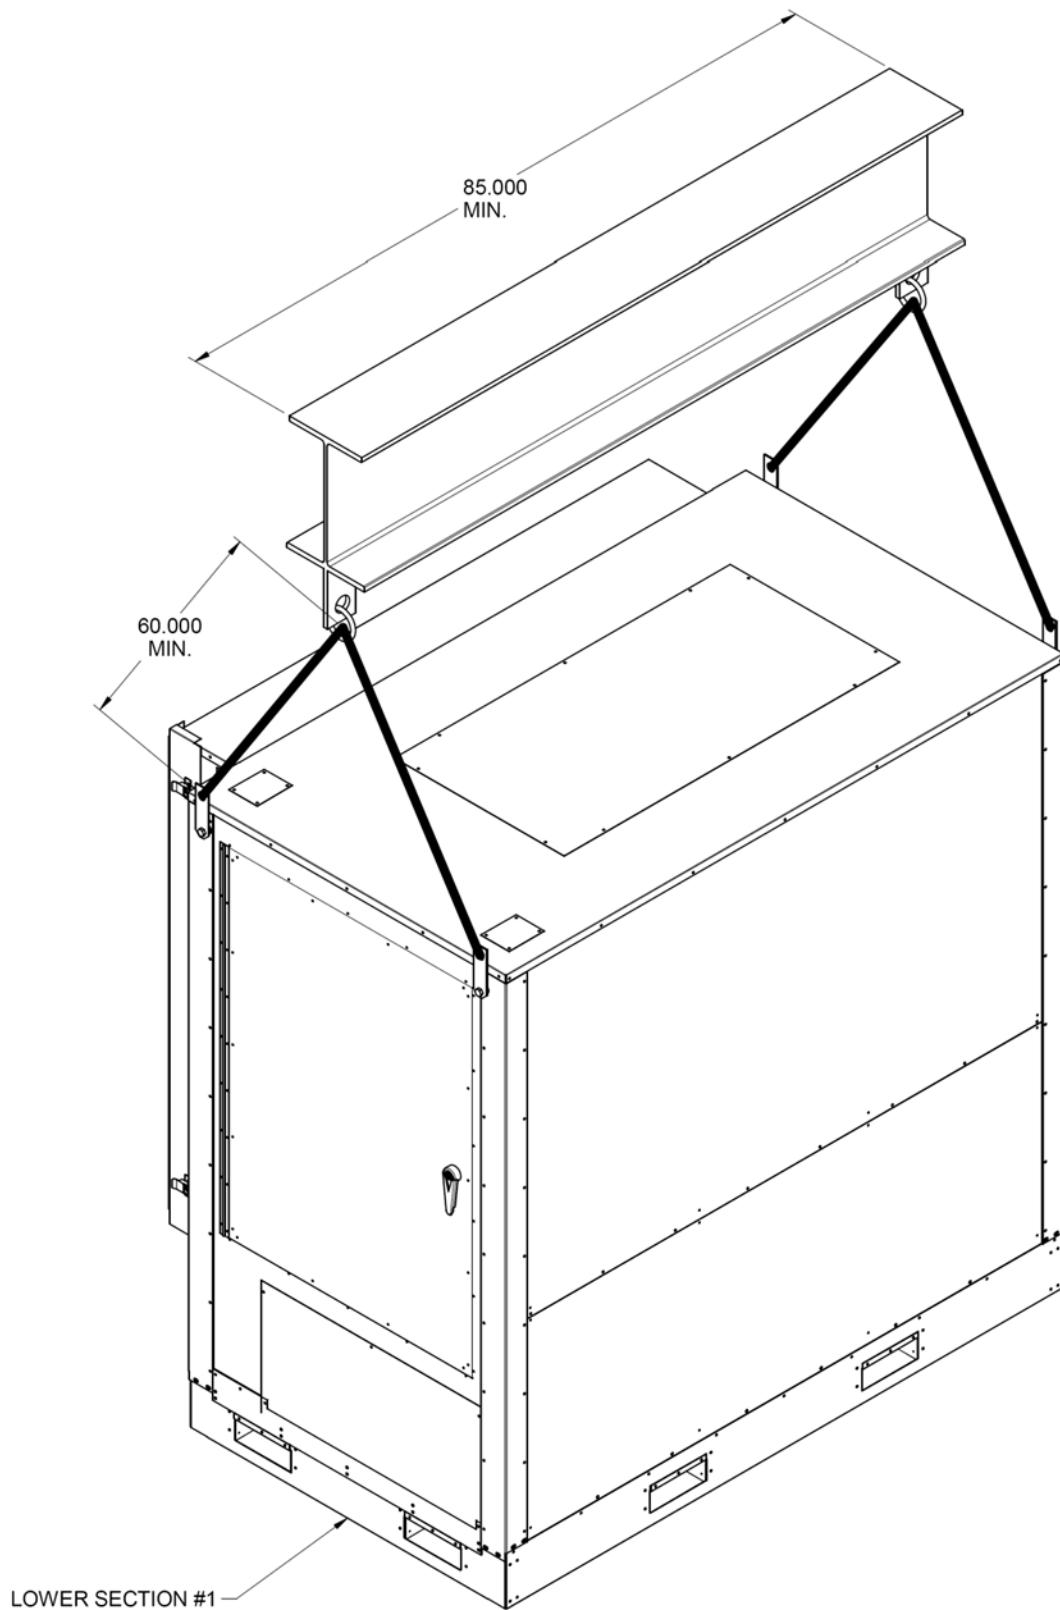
Two Piece Single Unit Coil Section Lifting Details
